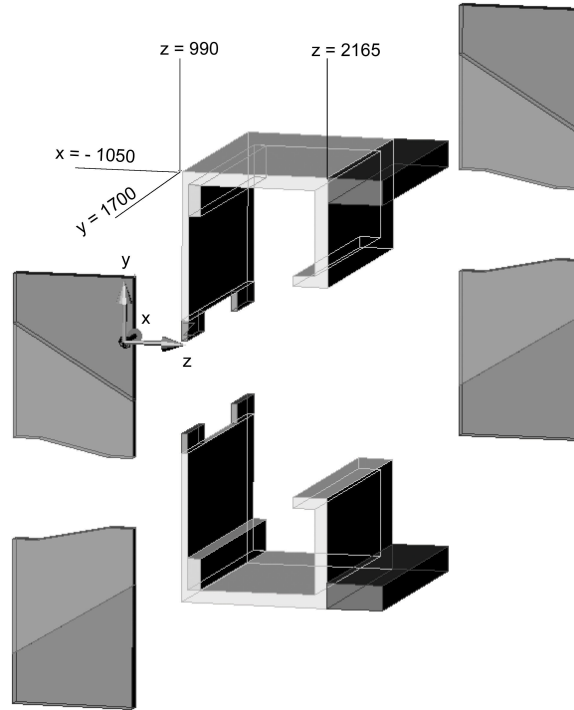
Exploded view of the components of the RICH1 magnetic shielding. Coordinates are in mm.
